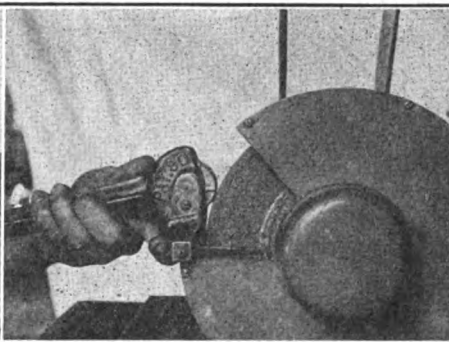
THE WHEEL SHOULD BE FREQUENTLY TRUED SO AS TO CUT PROPERLY
